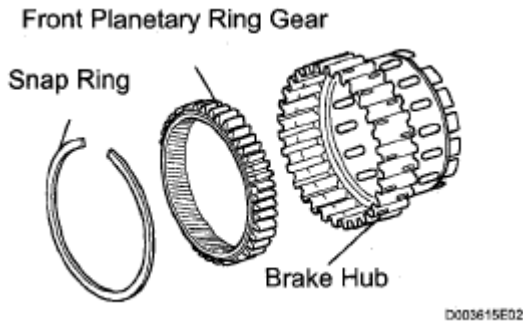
Identifying Snap Ring, Brake Hub And Front Planetary Ring Gear
